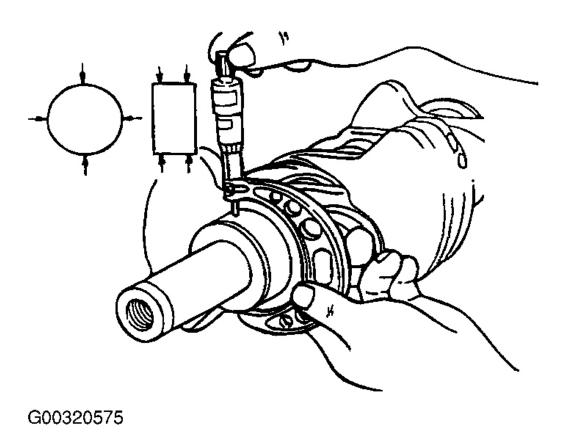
Measuring Crankshaft Journal Courtesy of KIA MOTORS AMERICA, INC.
